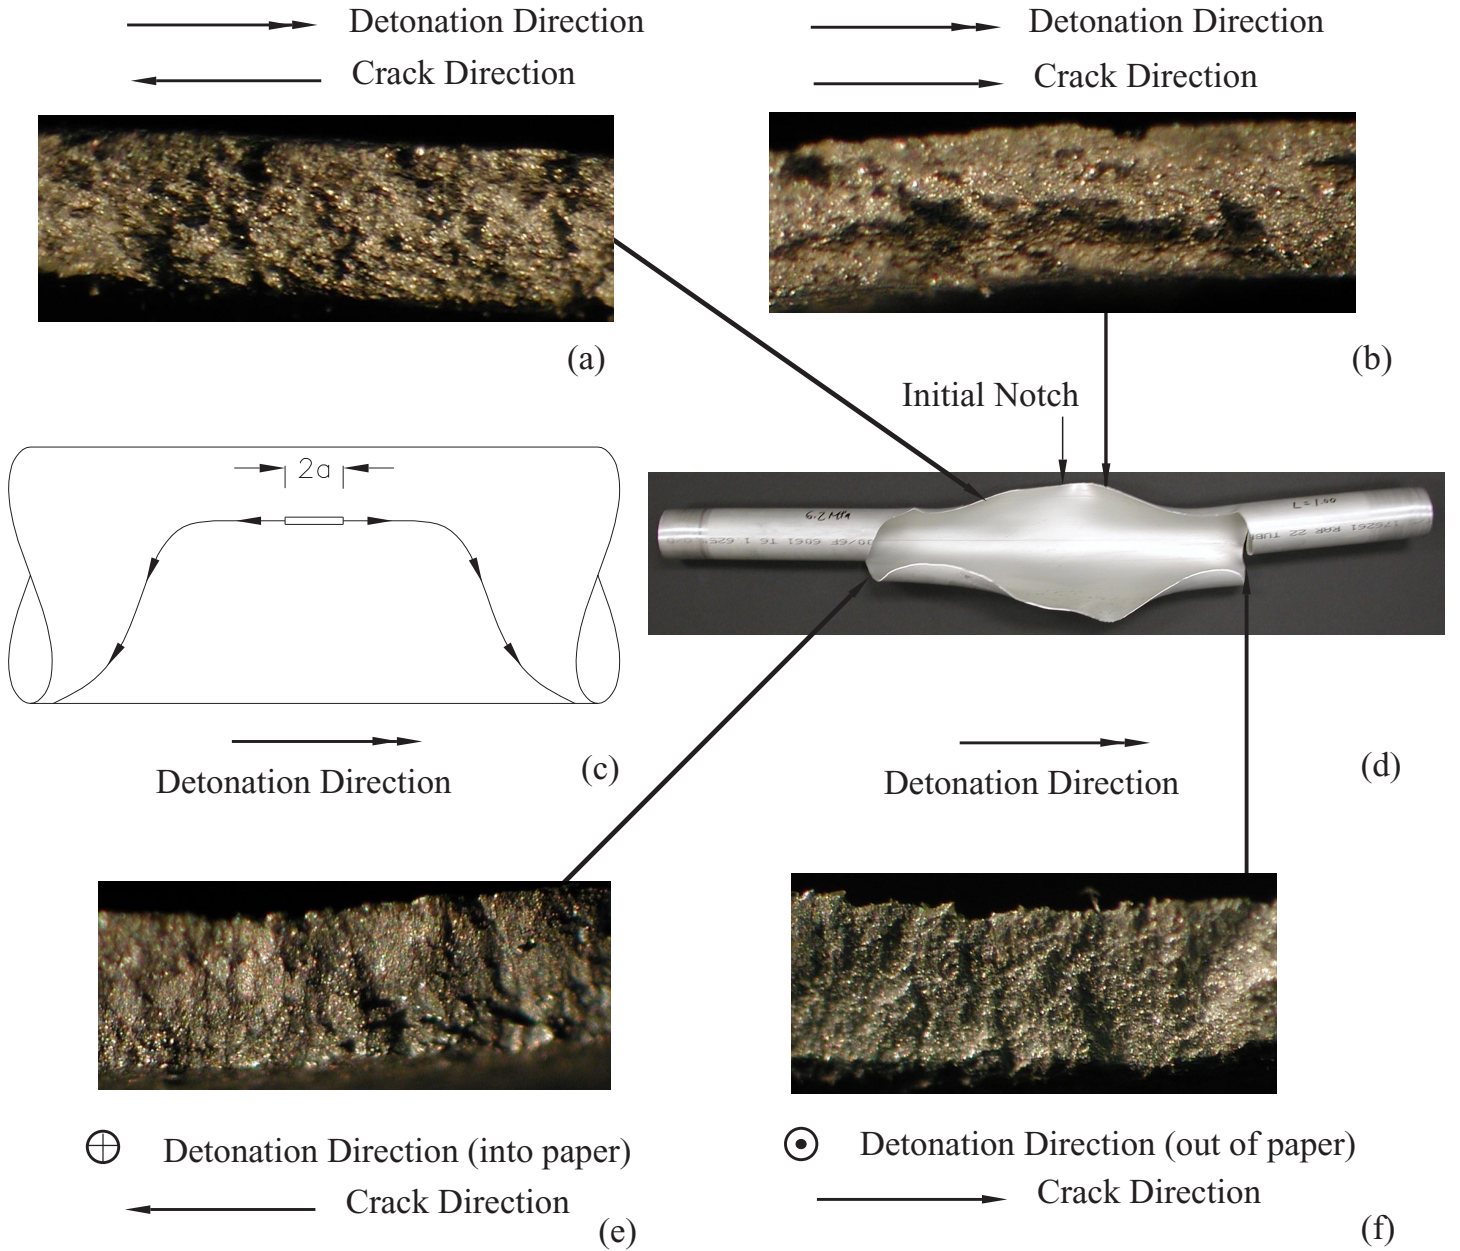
Fractographs, post-test specimen, and crack path schematic for a tube fractured under detonation loading.
